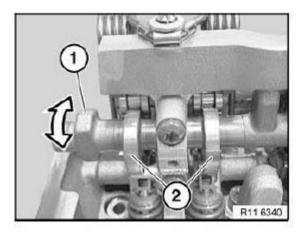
Identifying Eccentric Shaft And Lift Courtesy of BMW OF NORTH AMERICA, INC.
